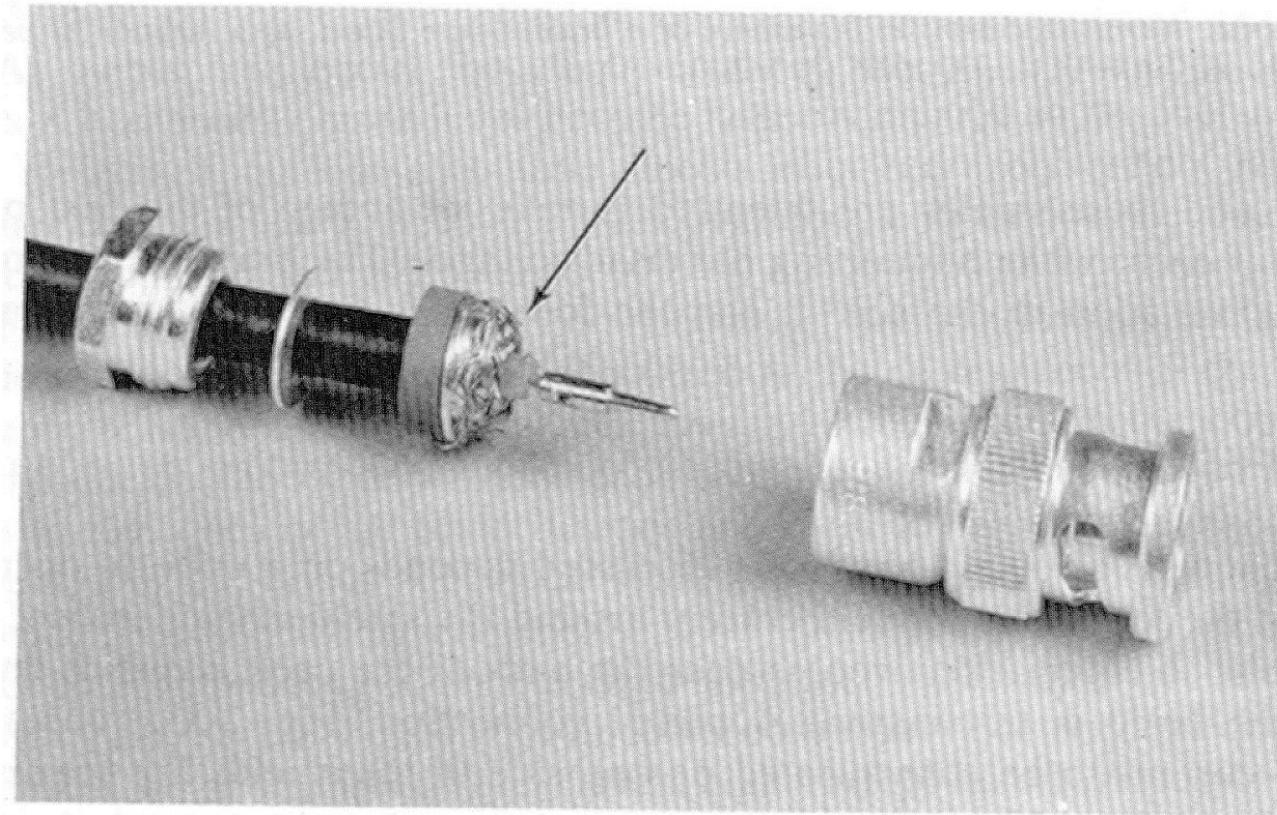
Disassembled BNC connector showing a 360° contact to shield.
